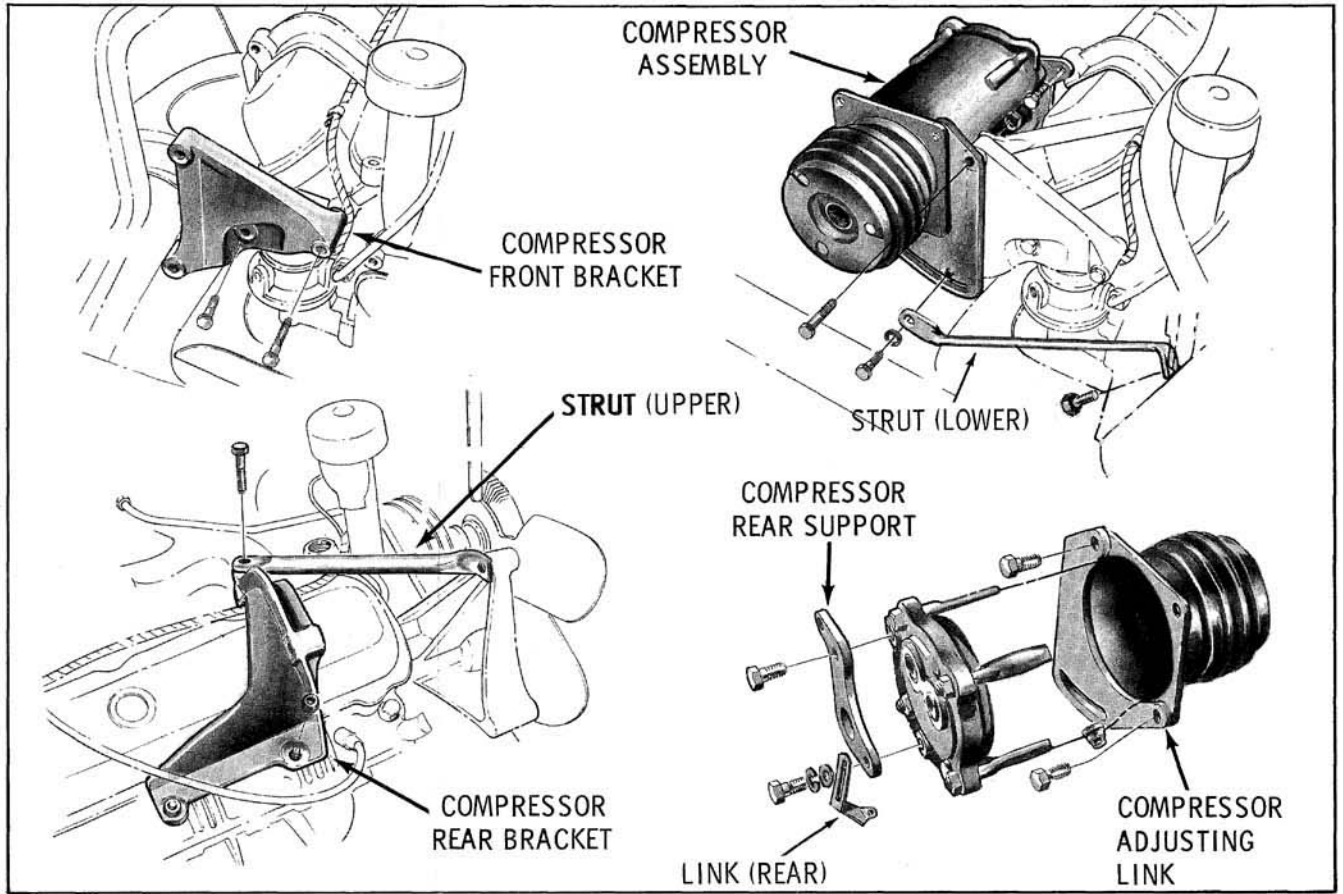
Compressor Mounting V-8 (34, 36 and 38 Series)
